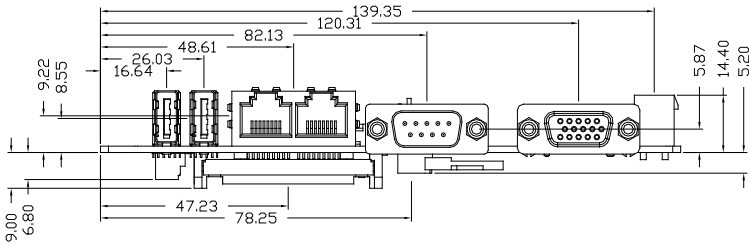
PCM-9363 Mechanical Drawing (Side View)
